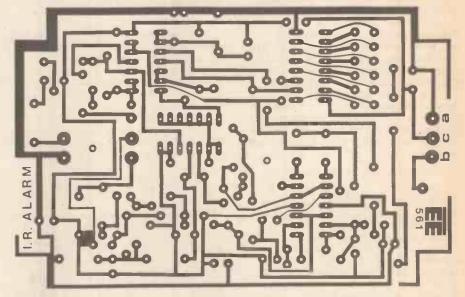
Full size printed circuit master pattern for the Infra Red Alarm-Detection Head.
